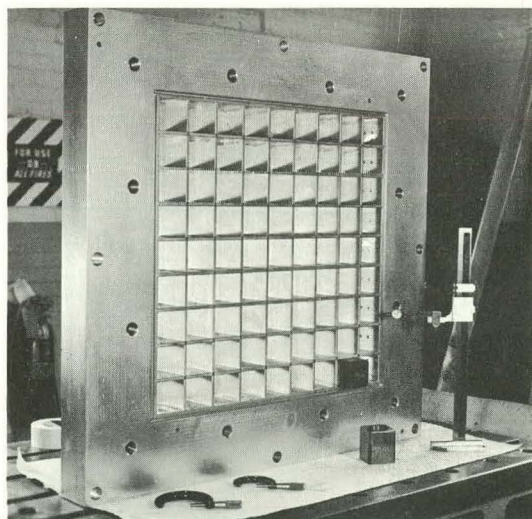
Photograph of reactor core structure lower grid assembly (NRTS-61-1161).
